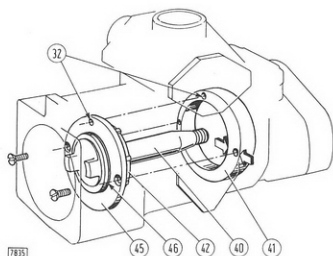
Transfer Pump Cam Ring in Assembled Position
